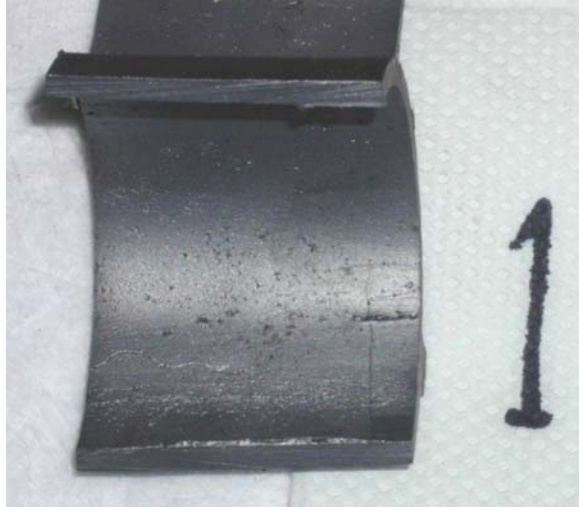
Section of tube # 1 showing SAC crack on the inner surface of a carbon steel tube. The affected area was under the attachment weld.
